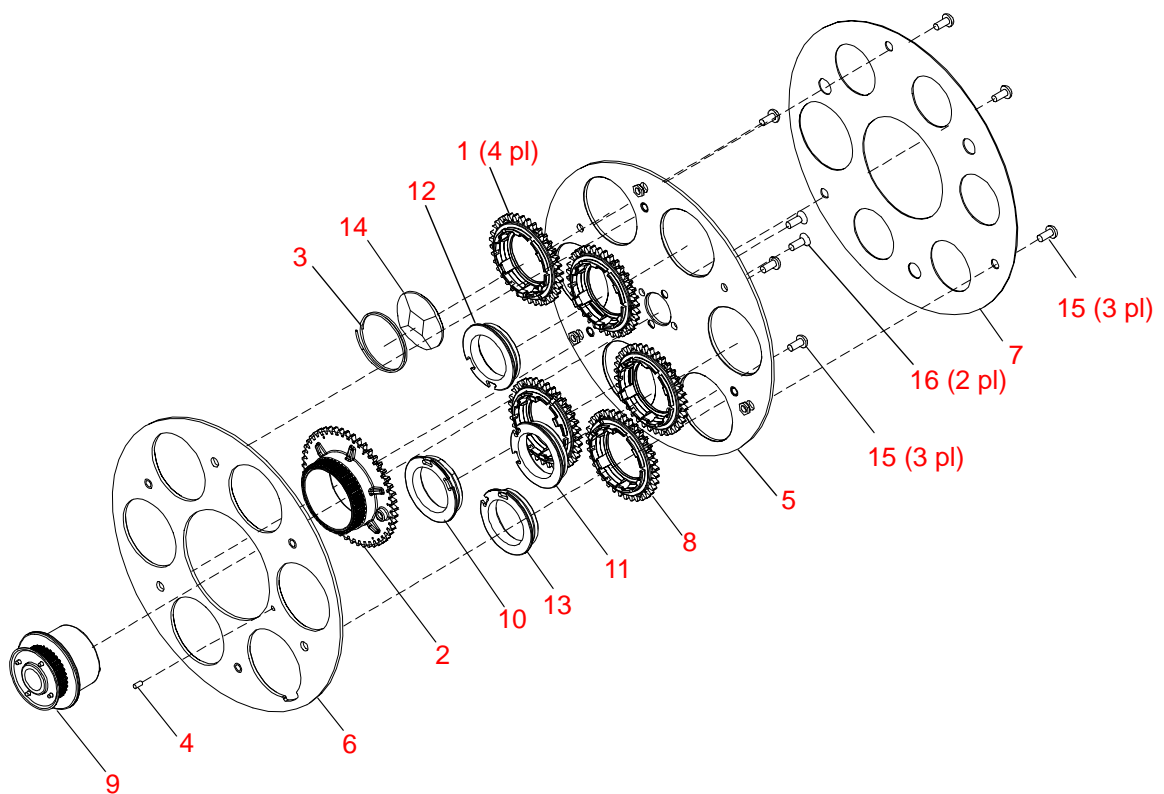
VL6B/VL6C Rotating Gobo Wheel Assembly
